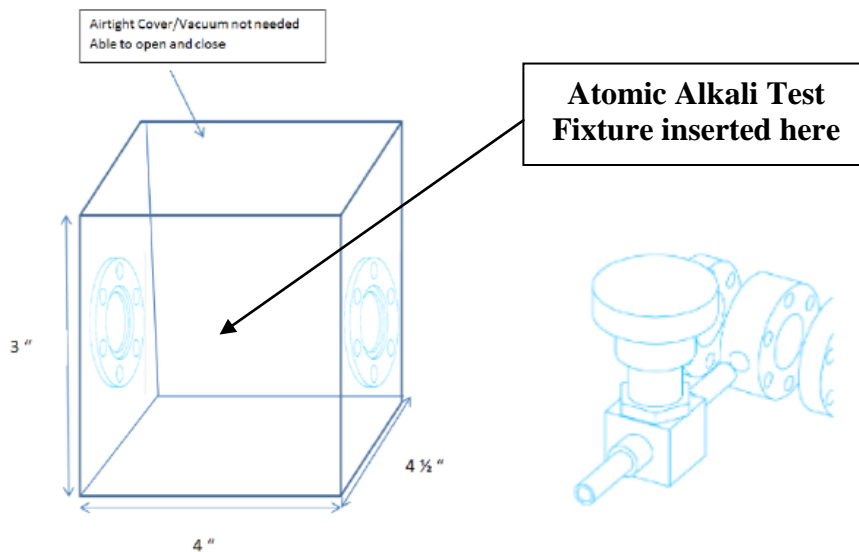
Oven showing possible additional purge assembly to be attached, right.
